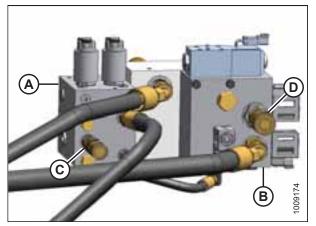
Manifolds with Reverser Valve Configured for Auger Header
